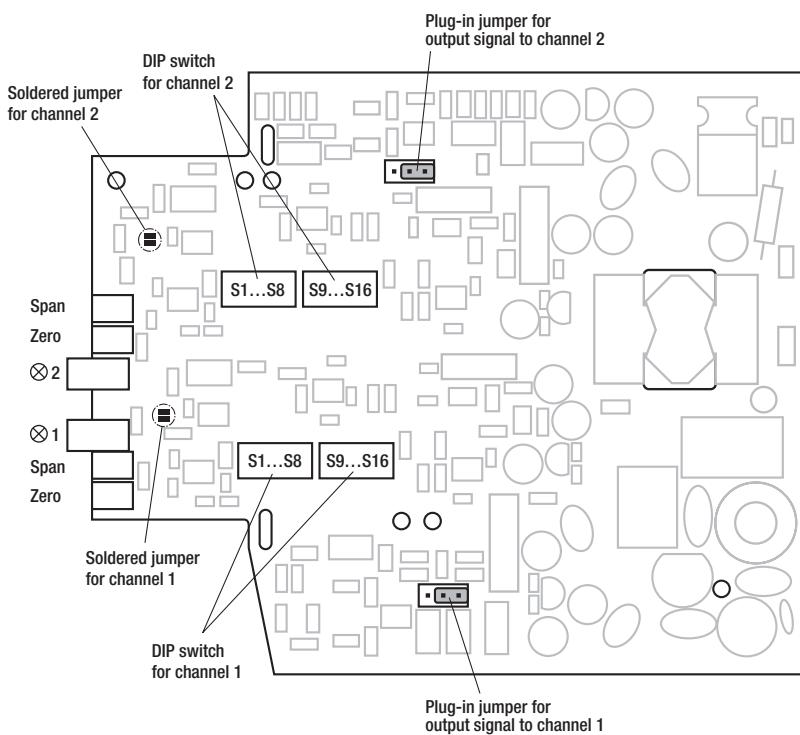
Position of the DIP switches S1...S16, plug-in jumpers and soldered jumpers.
